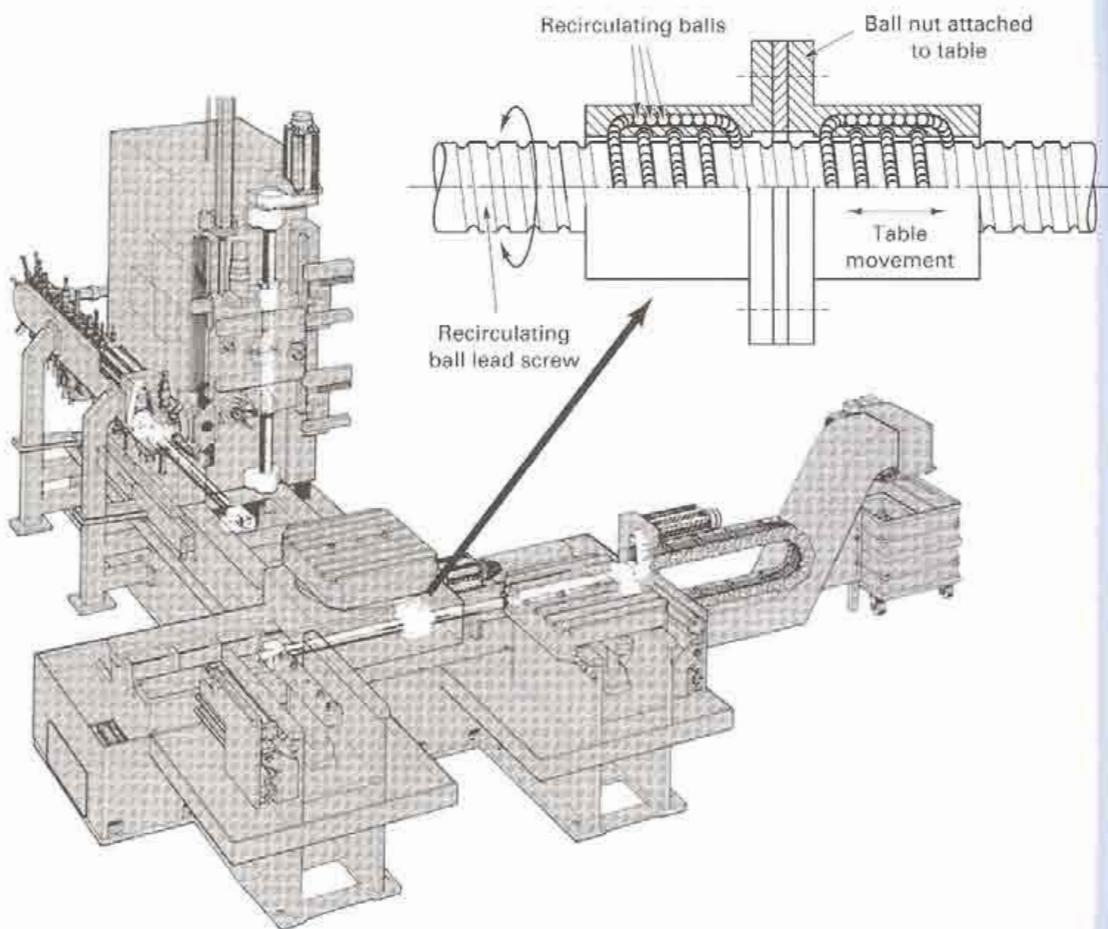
The ball lead screw shown in detail provides great accuracy and position to NC and CNC machine tools.
